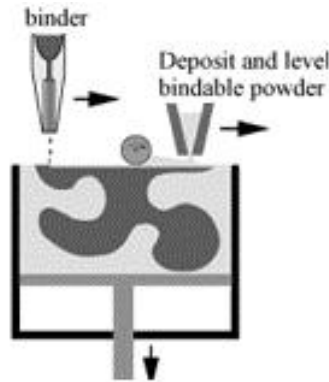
Schematic of three dimensional printing process (courtesy of turkcadcam.net)
